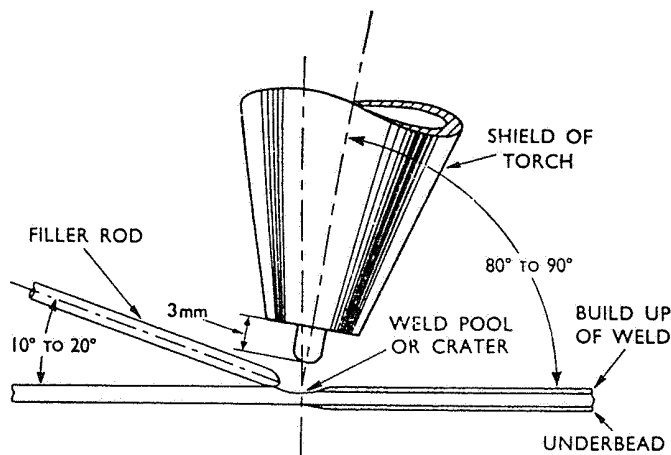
RECOMMENDED ANGLES FOR TORCH AND FILLER ROD
